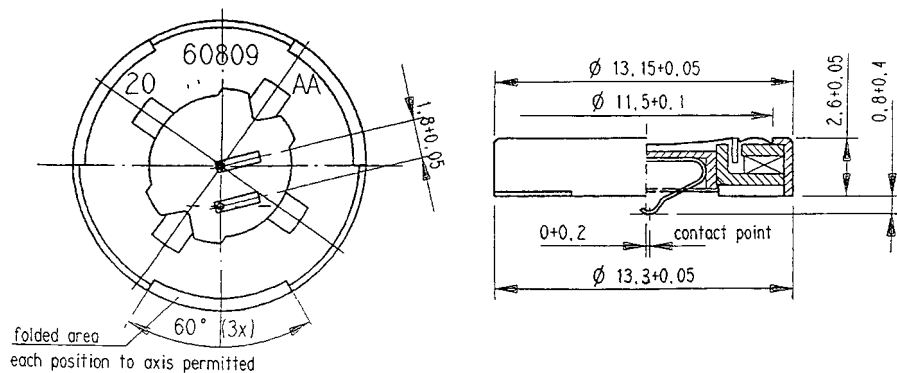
Bottom view (left) and side view/ cross-sectional view (right) of new PSS 13 mm leak tolerant earpiece capsule, type WD00518 (from [22]).
